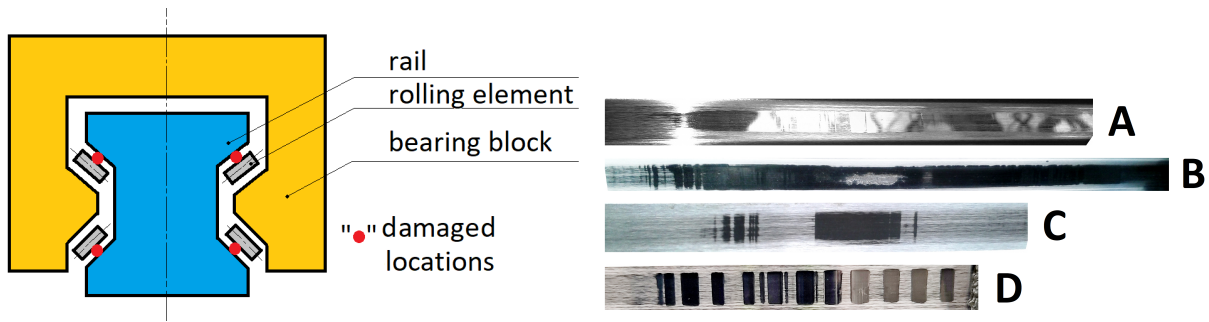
Schema of linear guideway (left); damaged sides of rails (right)
